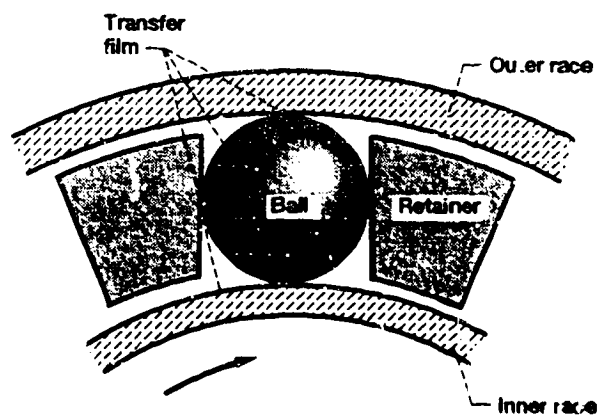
Illustration of ball bearing film-transfer mechanism (14).
